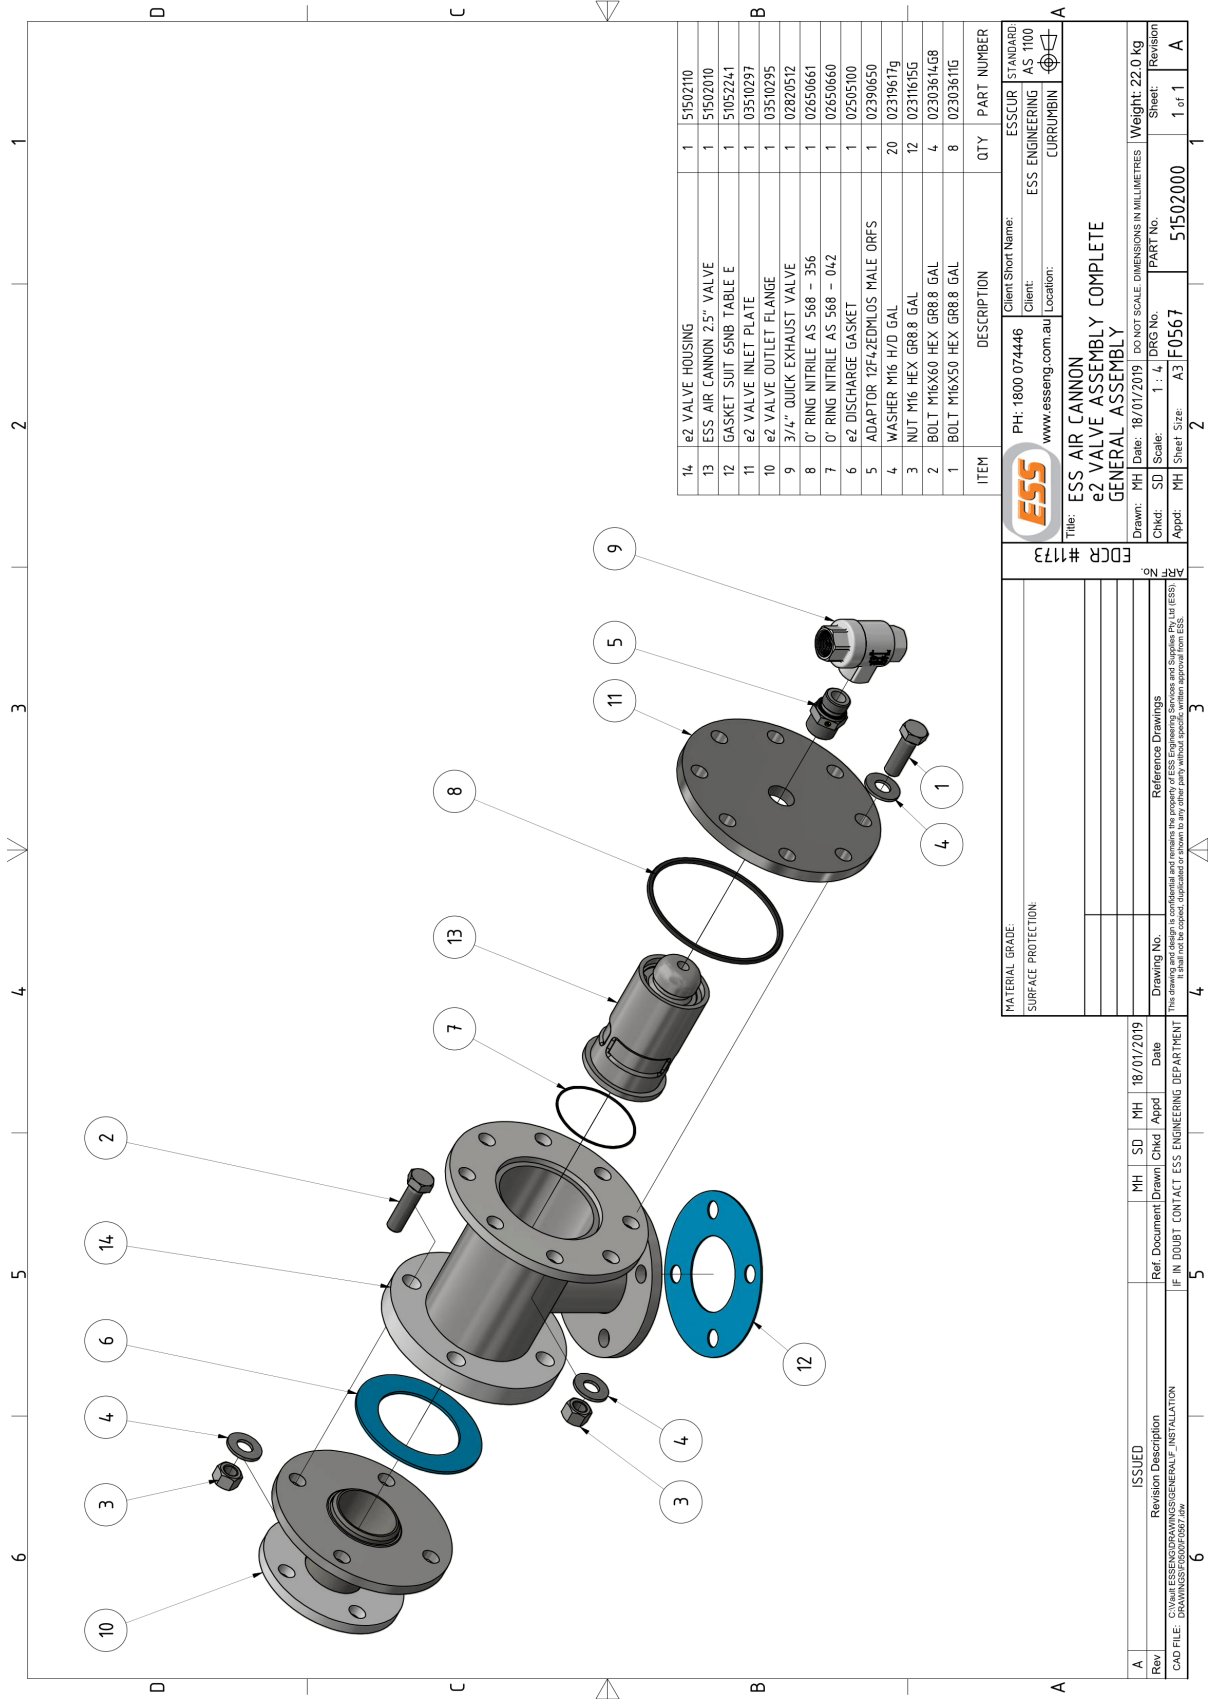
F0567 e2 VALVE ASSEMBLY COMPLETE
